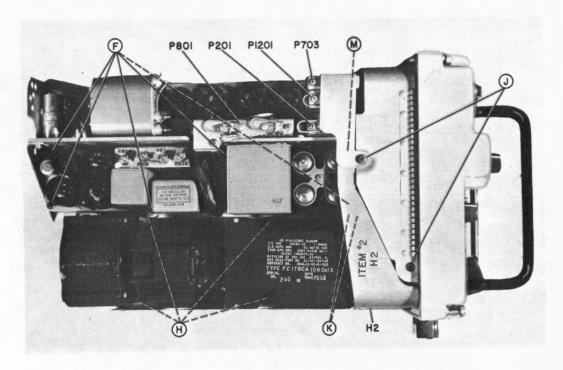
Receiver Transmitter RT-581()/URC-9, Left Side, Subassembly Removal
